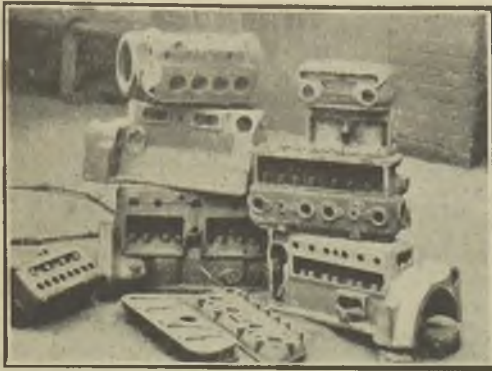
GROUP OF CYLINDERS AND HEADS.
